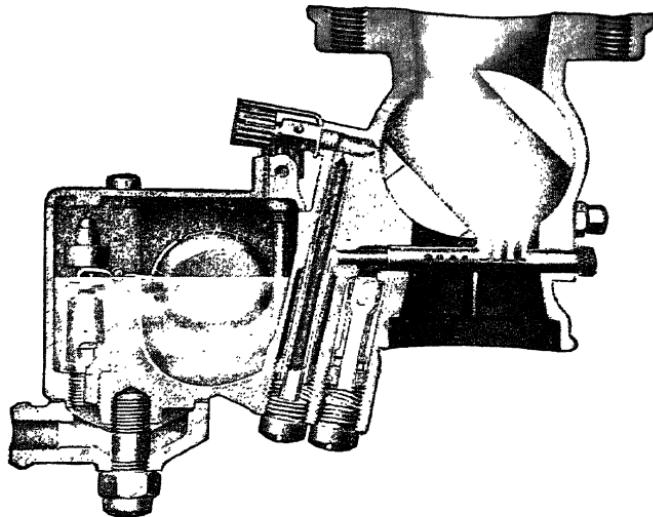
Cross Sectioned View of Winfield Carburetor at One-Half Open Throttle
